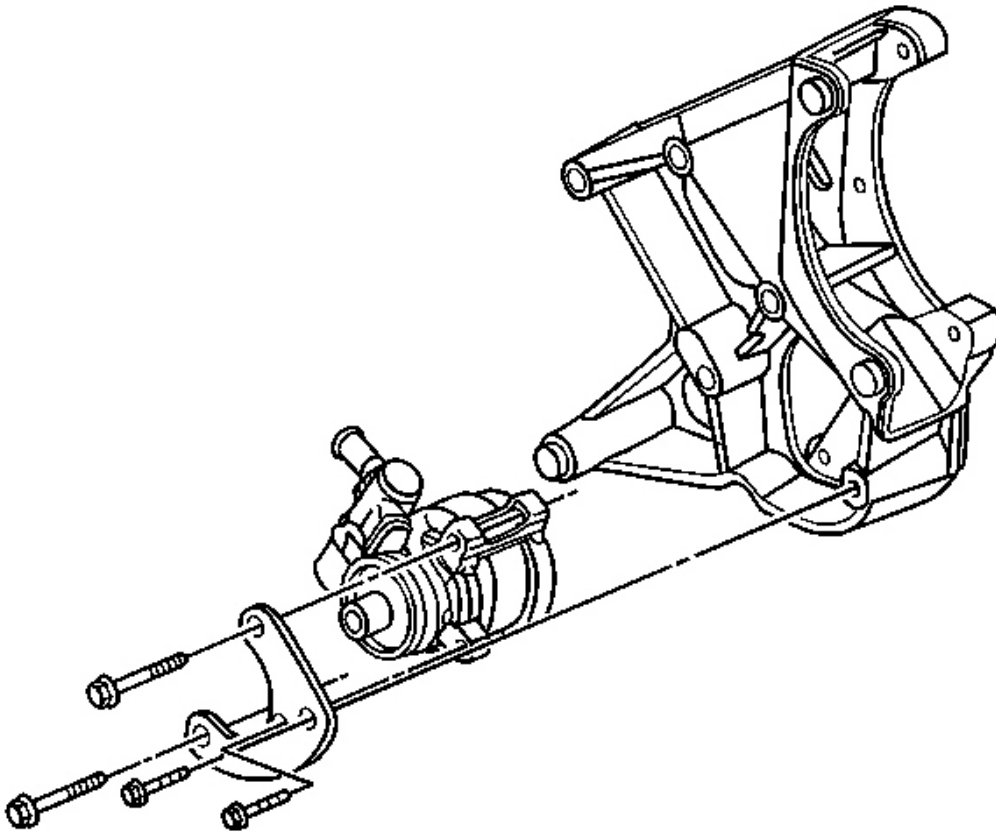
Power Steering Pump, Generator Bracket & Bolts
